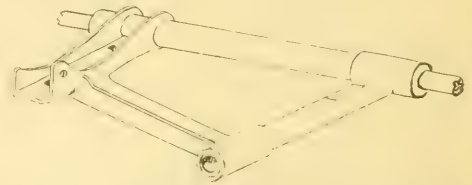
By using the old bolt-holes and bracing to frame of casting, an absolutely true and rigid set of bearings can be obtained.
